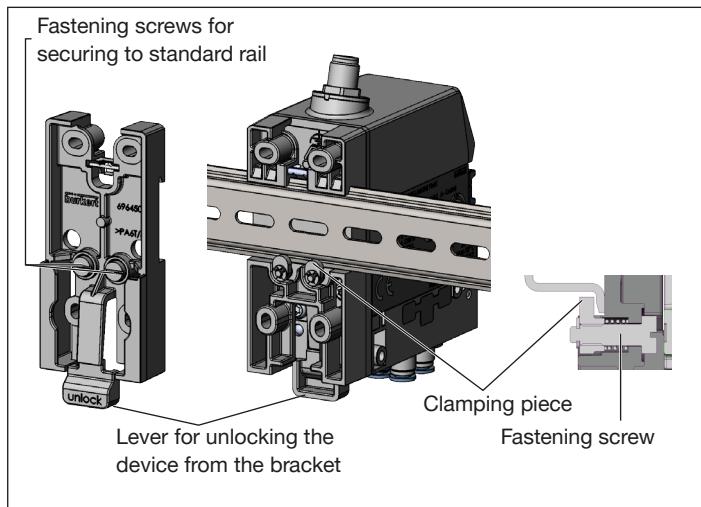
Assembly on standard rail for AirLINE Field Type 8653 field module
